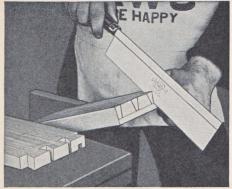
Sawing half-blind dovetails with ATKINS Silver Steel Dovetail Saw.
